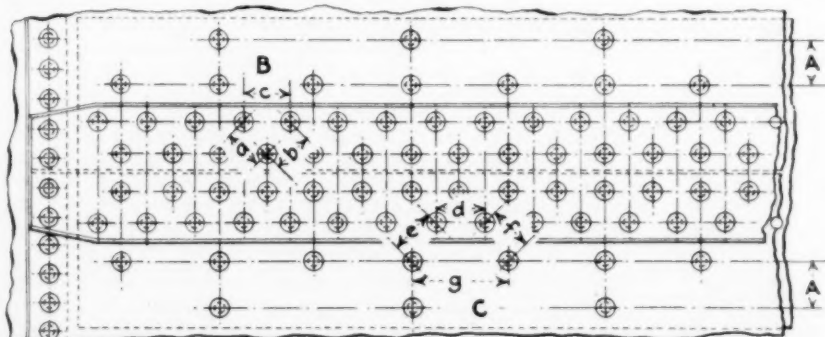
A TYPICAL QUADRUPLE BUTT STRAP JOINT, SHOWING APPLICATION OF PAR. 182
